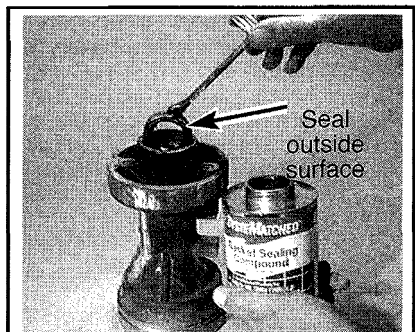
For dual back-to-back seals, apply a light coating of sealant to the metal seal case
